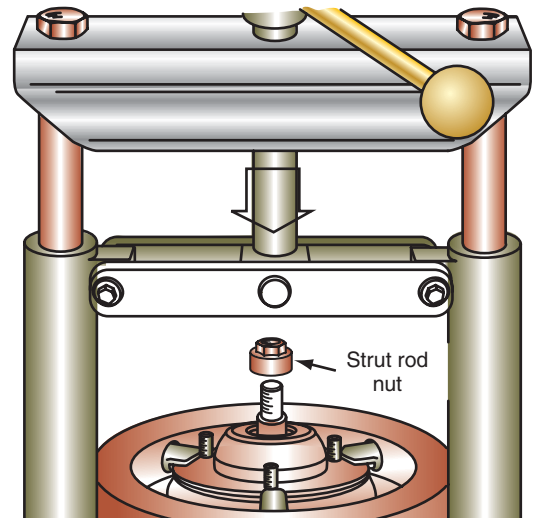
Installing strut in coil spring with proper lower spring seat alignment.
